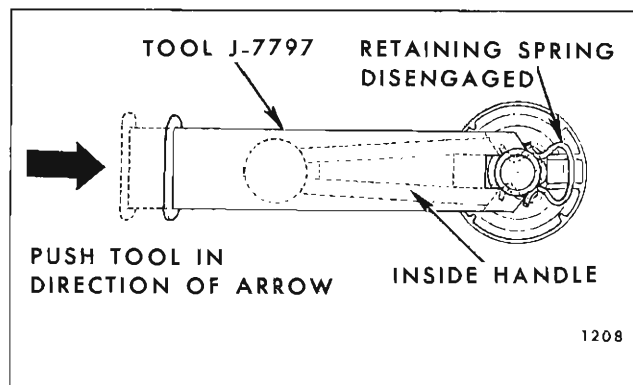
D1—Disengaging Door Inside Handle Retaining Spring
